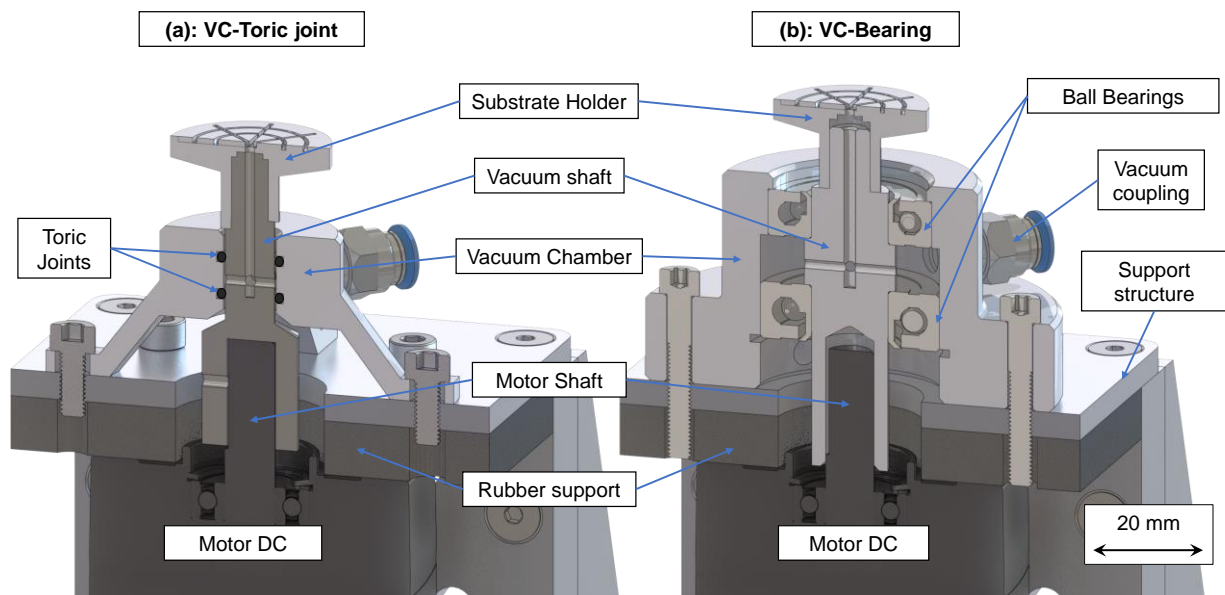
3D cut view CAD design of the Vacuum-Chuck systems. (a) VC sealed with toric joints, (b) VC sealed with bearings.
